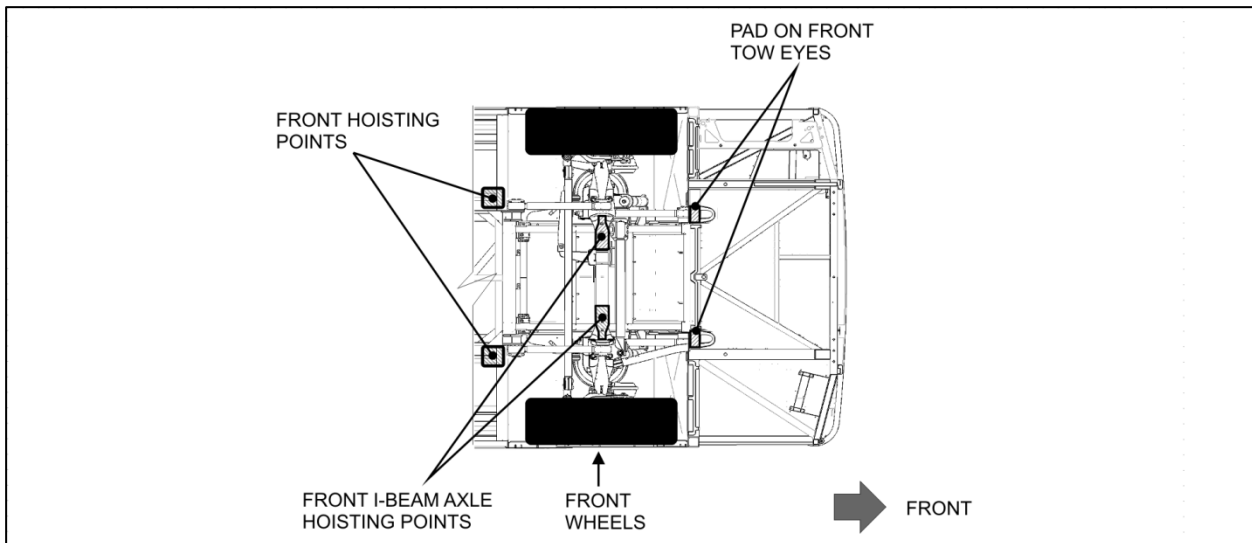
OPTIONAL FRONT CHASSIS HOISTING POINTS
